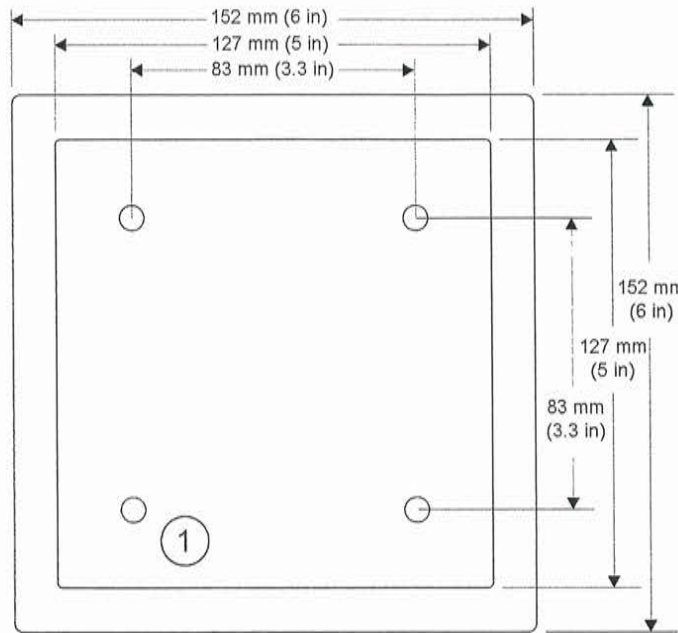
RDP-110C Mounting Dimensions (Rear Panel)
